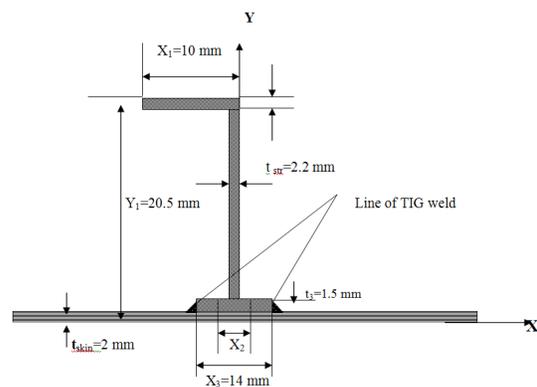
The sizes and attachment of a stringer by TIG welding.
